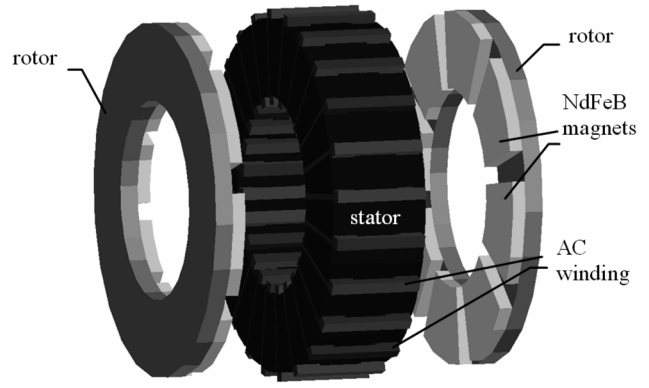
8-pole, 24-slot axial-flux surface-mounted magnet machine.
